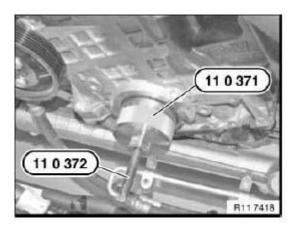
Identifying Special Tool 11 0 371 Into Crankshaft Seal Courtesy of BMW OF NORTH AMERICA, INC.
